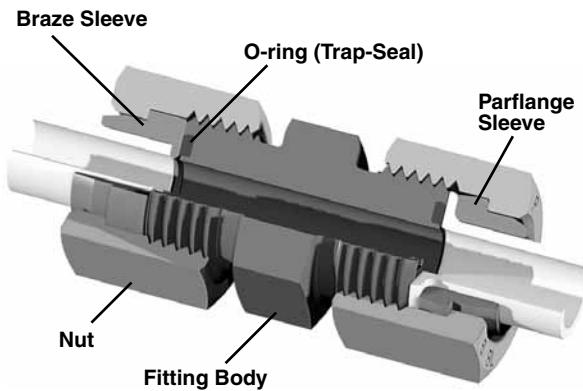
Seal-Lok Union cutaway with flanged and brazed assemblies
